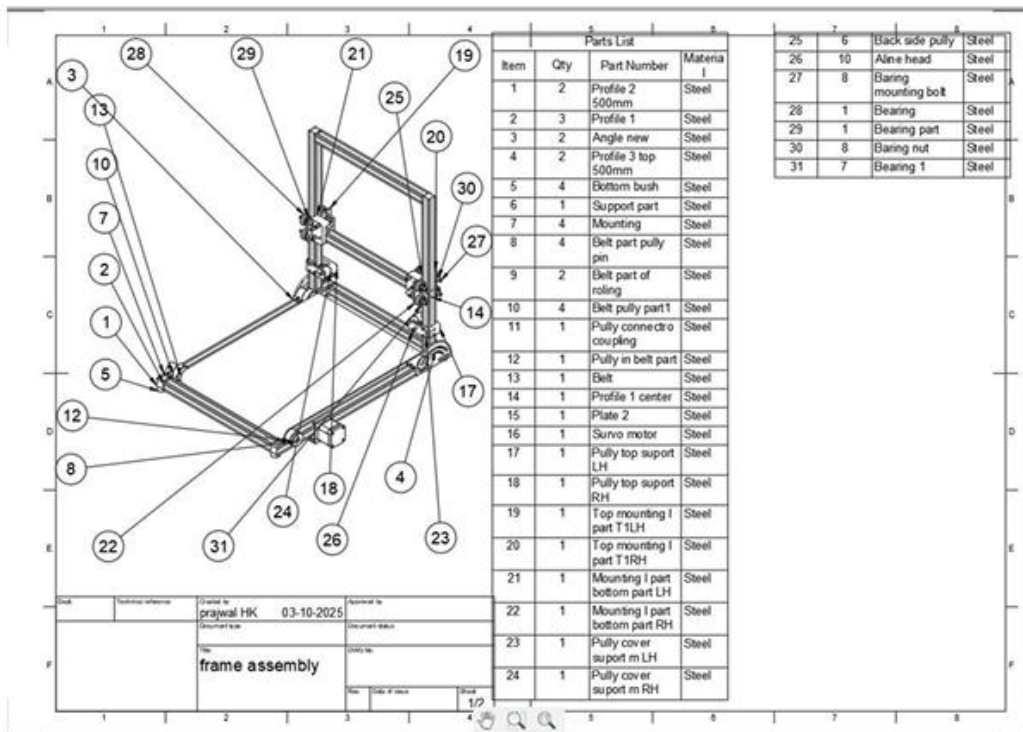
Bill of Materials (BOM) generated for the printer assembly
